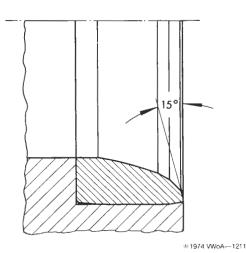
Outer edge of valve seat. Chamfer to 15°.
